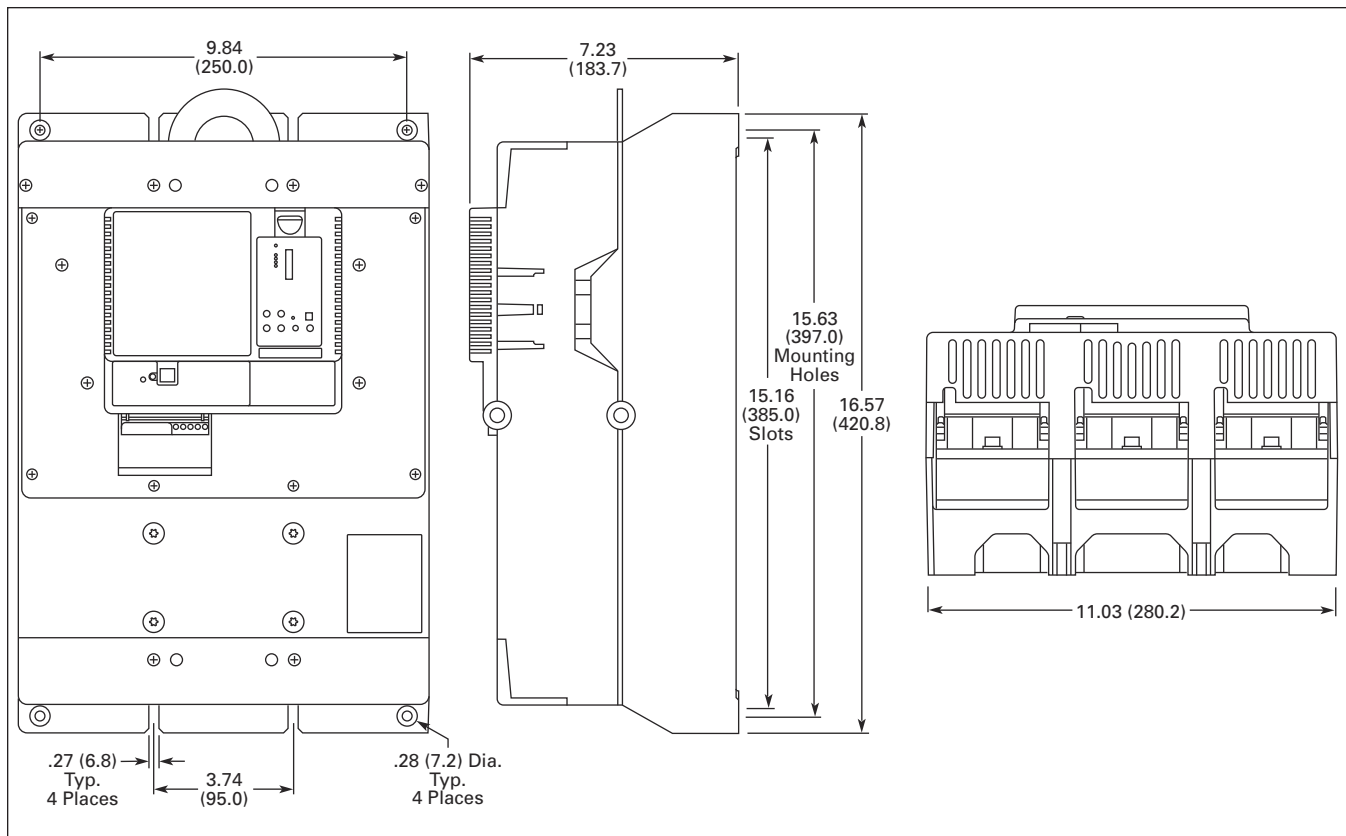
V-Frame (290 mm) S801 Approximate Dimensions in Inches (mm)
